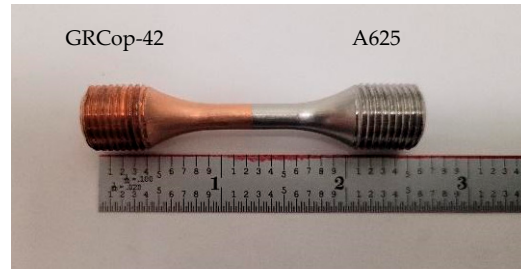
Bimetallic mechanical test bar for tensile and fatigue testing.
